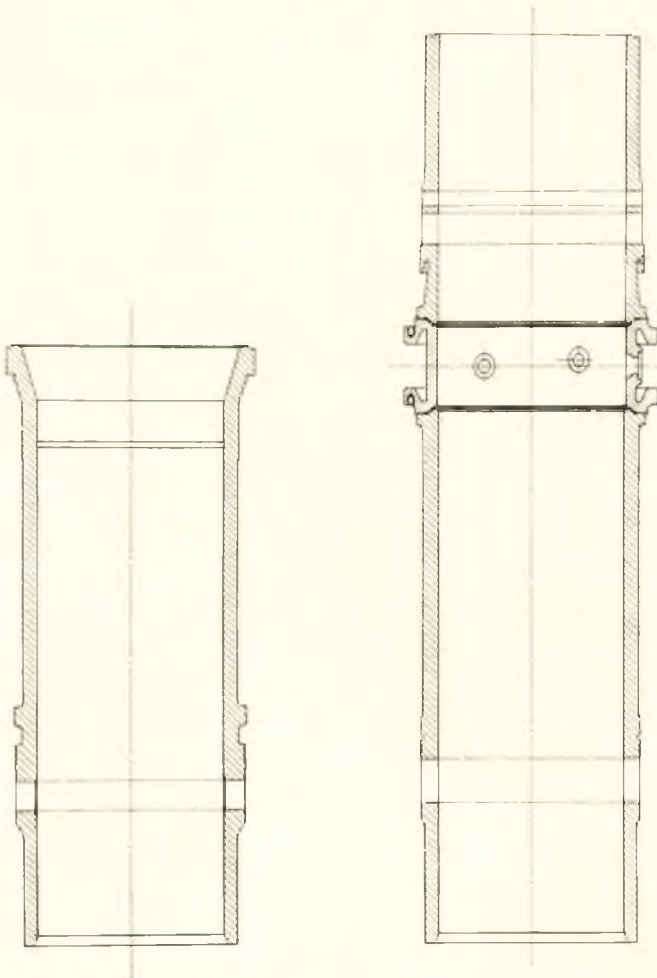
Cylinder liners for a 740 mm. poppet valve engine and a 750 mm. opposed piston engine
